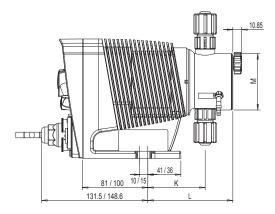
Dimension drawing Beta b BT4b/BT5b, material version PP - dimensions in mm
